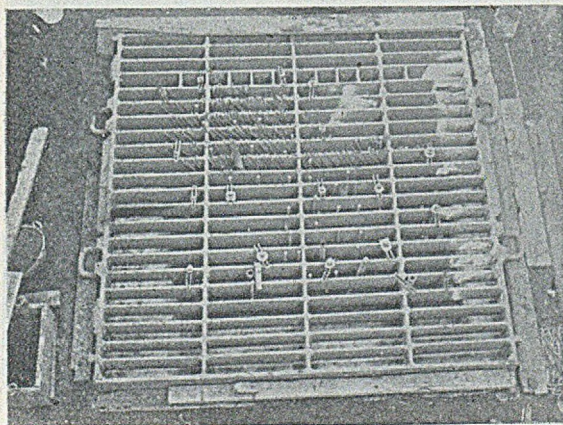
Top-part Box placed over the Cylinder Mould Pit and Grids Scotched and Bolted.
